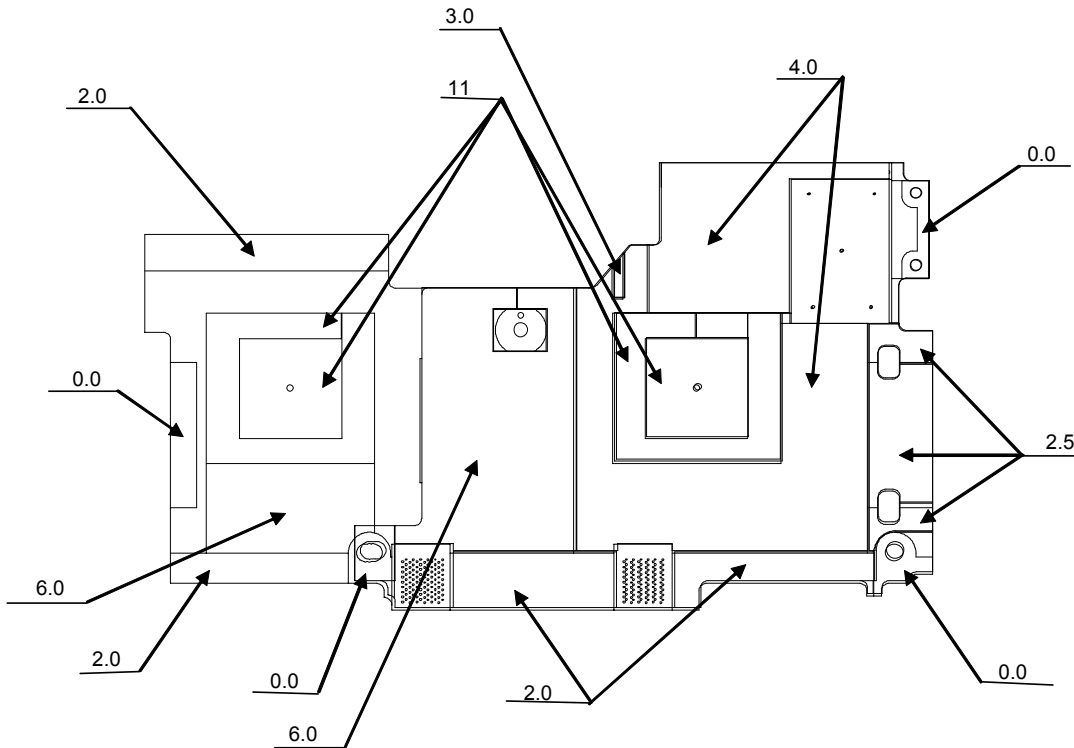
Large Form Factor High Speed I/O Expansion Card (LFF HSEC) – bottom view – component height restrictions (heights in mm)
